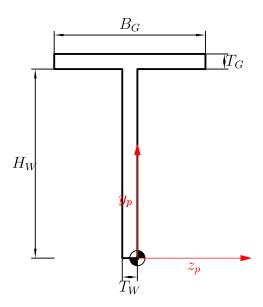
T: Cross section dimensions in a Poseidon T profile section.
